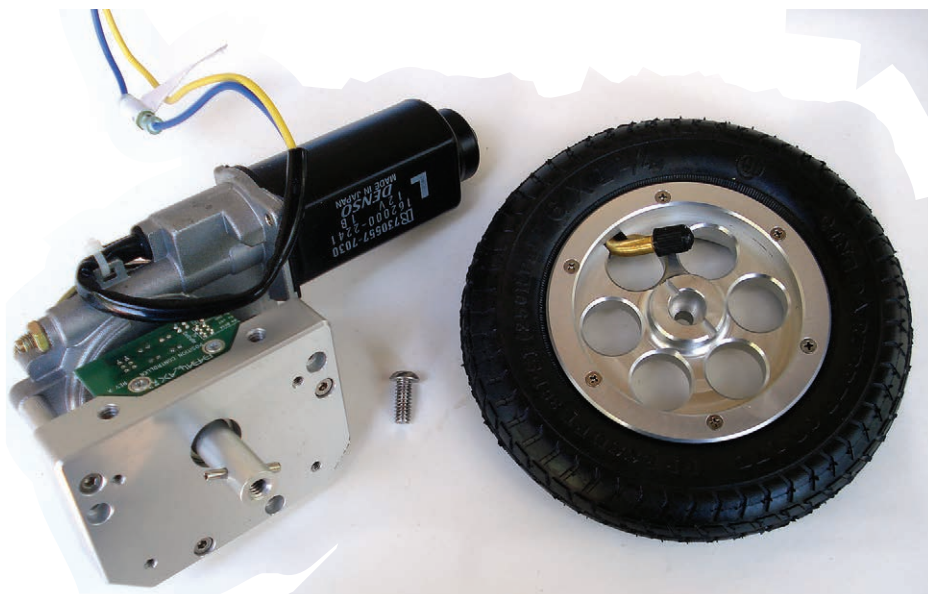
The completed motor assembly, showing the heavy-duty pillow block and assembled wheel.
